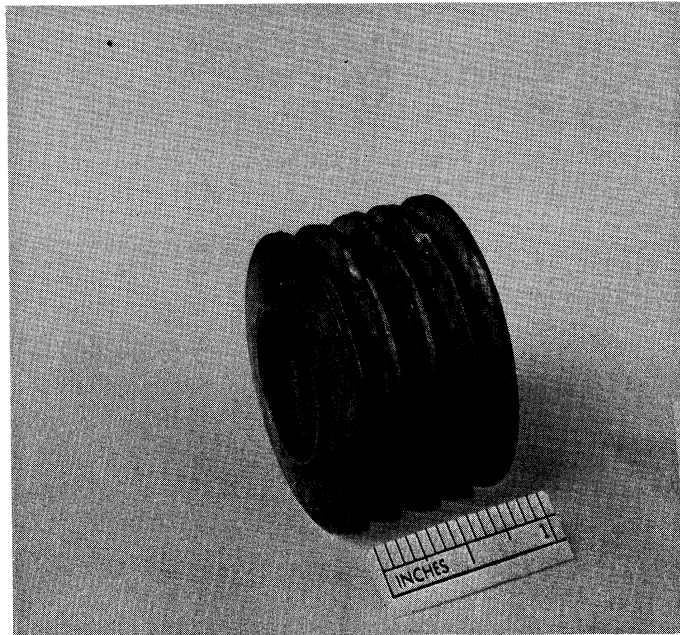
Belleville spring washers stacked by means of welding.
